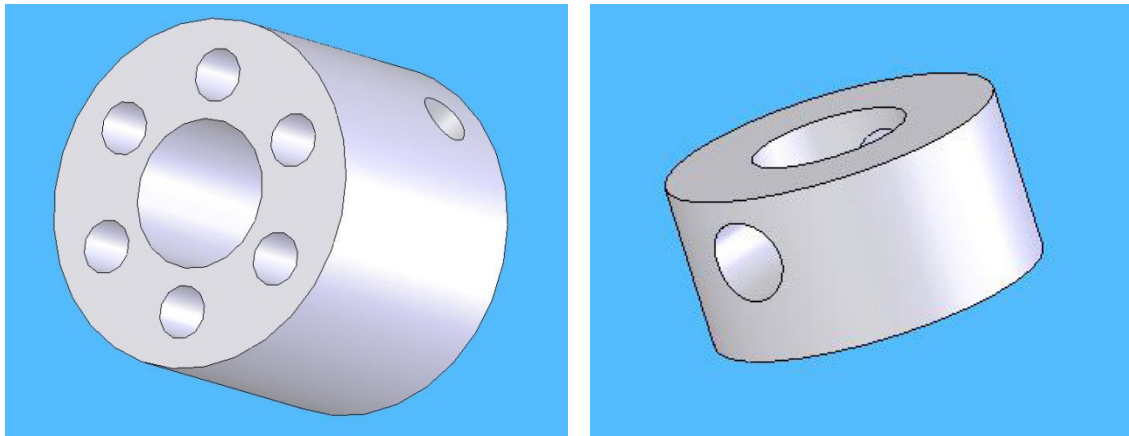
CAD drawings of the tibial rotation disc bushing and the slotted section compression bushing
